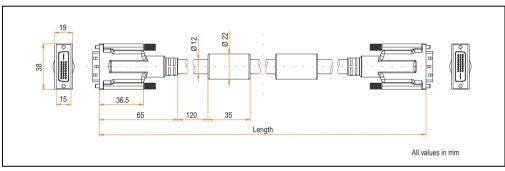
Dimensions - SDL cable 5CASDL.0xxx-03
